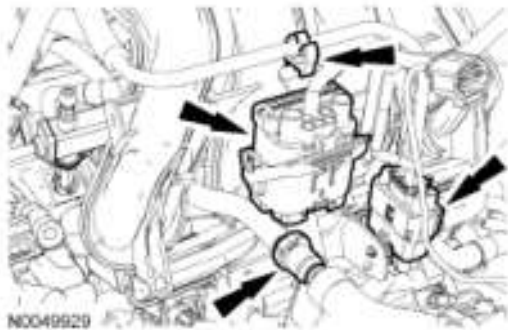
Locating Evaporative Purge Tube Quick Connect Coupling
